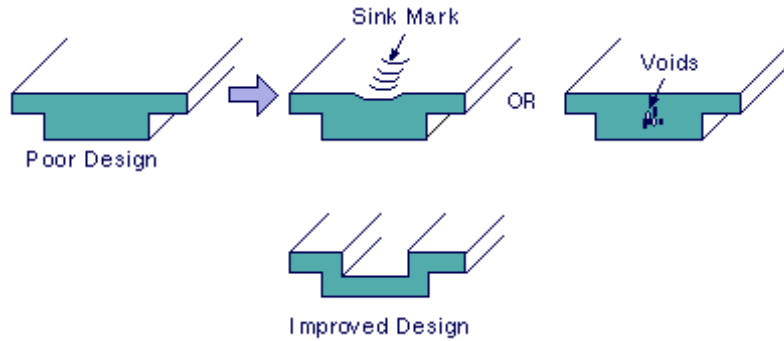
Defects caused by thick-wall design in an injection molded product [7]
